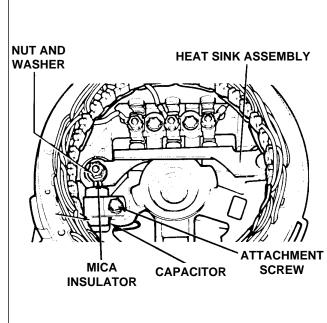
Rectifier and Heat Sink Assembly Removal
